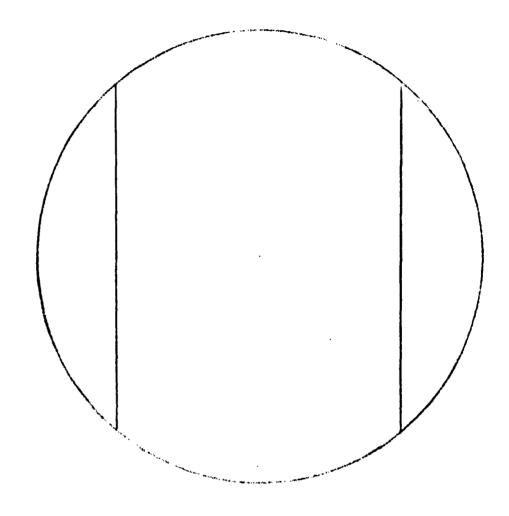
Weld Pattern Used for AISI 1020 Full Scale (185-Inch Diameter) and AMS 6434 Subscale (56-Inch Diameter) Steel Blanks
